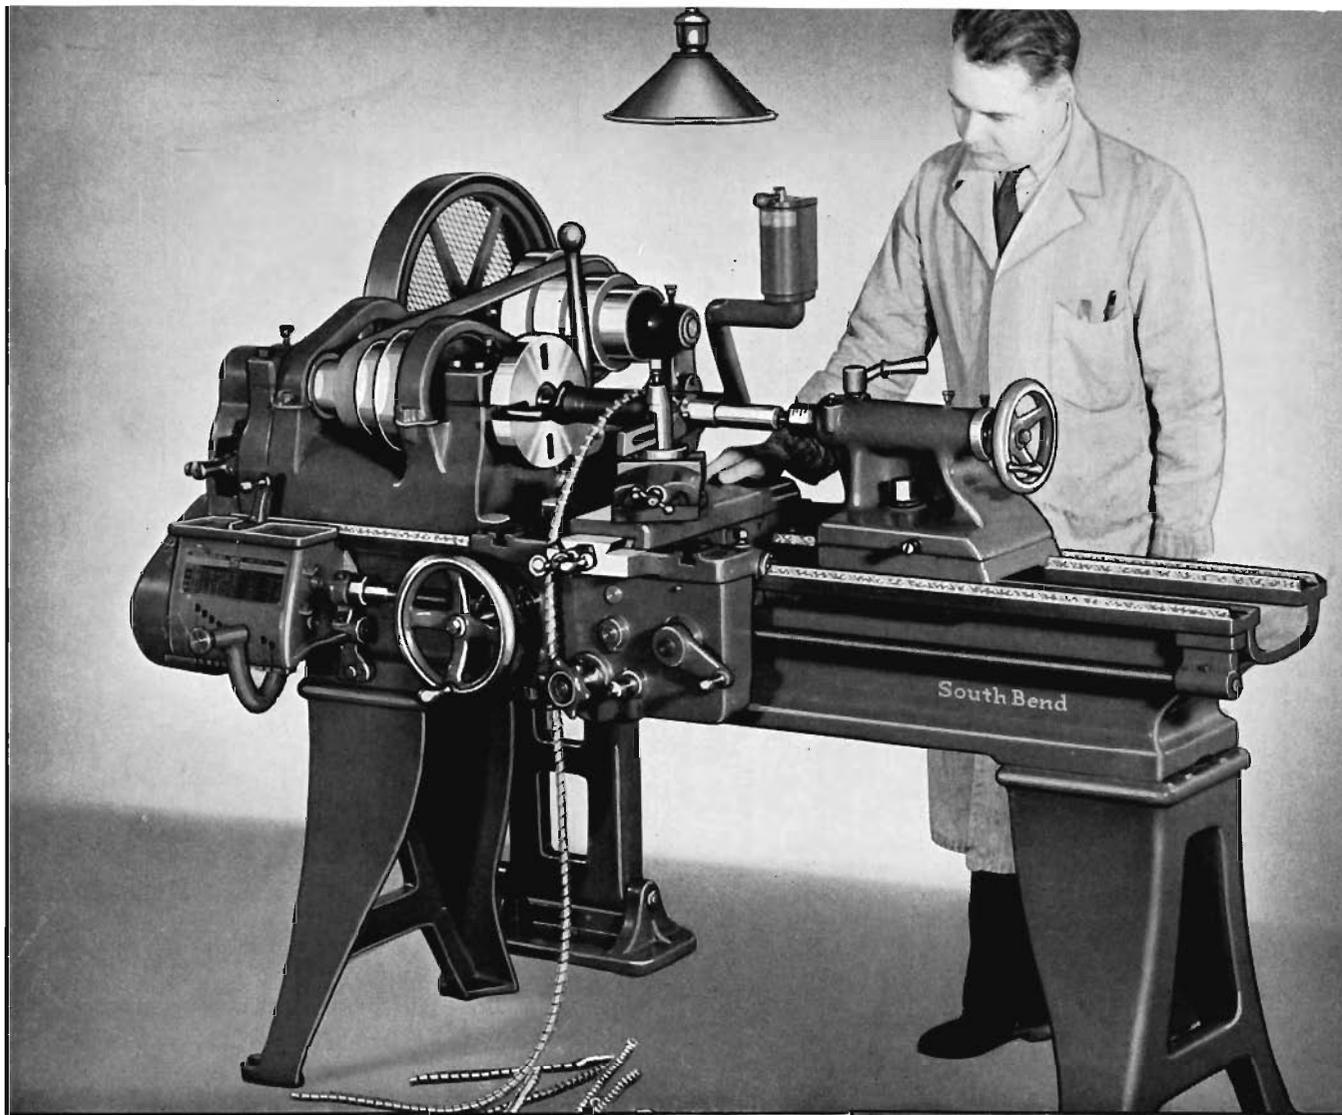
Quick Change Gear Pedestal Adjustable Motor Driven South Bend Lathe
